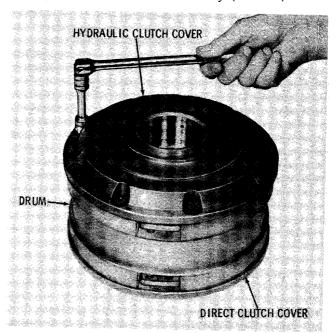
Removing (or installing) hydraulic clutch cover (VS series)
